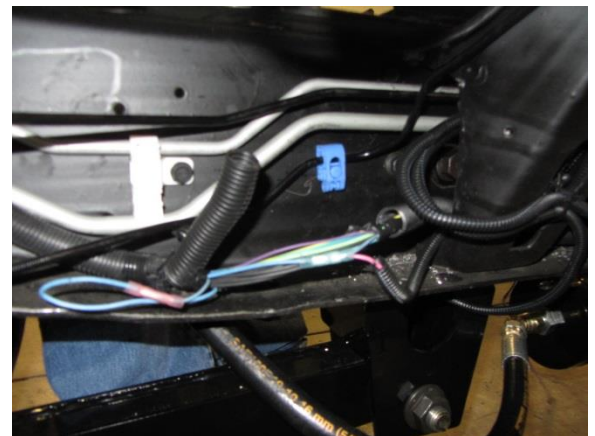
Light Blue wire spliced to Pink/Black wire. OEM Light Blue wire shown near cross member between rear suspension hangers. Wire may be found along driver side frame rail, closer to cab.
